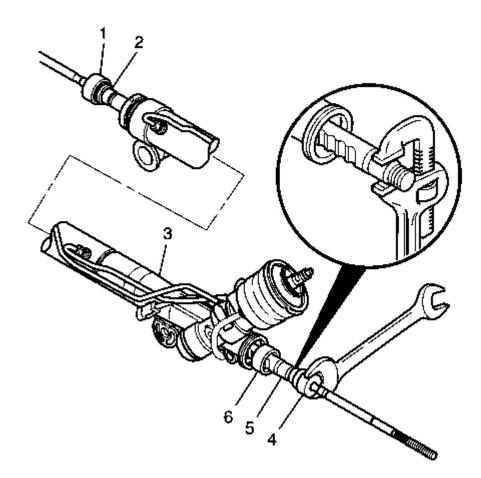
View of Shock Dampener, Inner Tie Rod Housing & Rack Courtesy of GENERAL MOTORS CORP.
